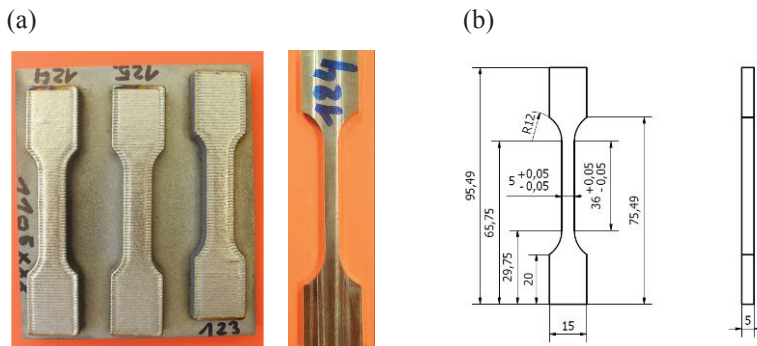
Tensile test (a) specimens including a representative of the milled parts; (b) dimensions (in mm) of the milled part
